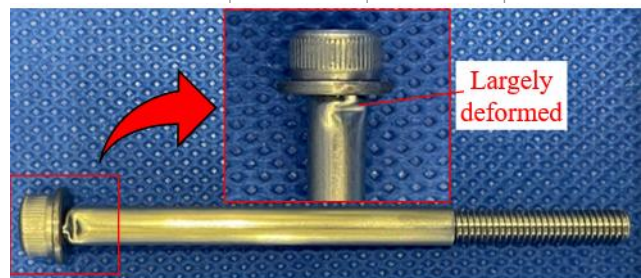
Deformation in a 0.2 mm thick-walled pipe
